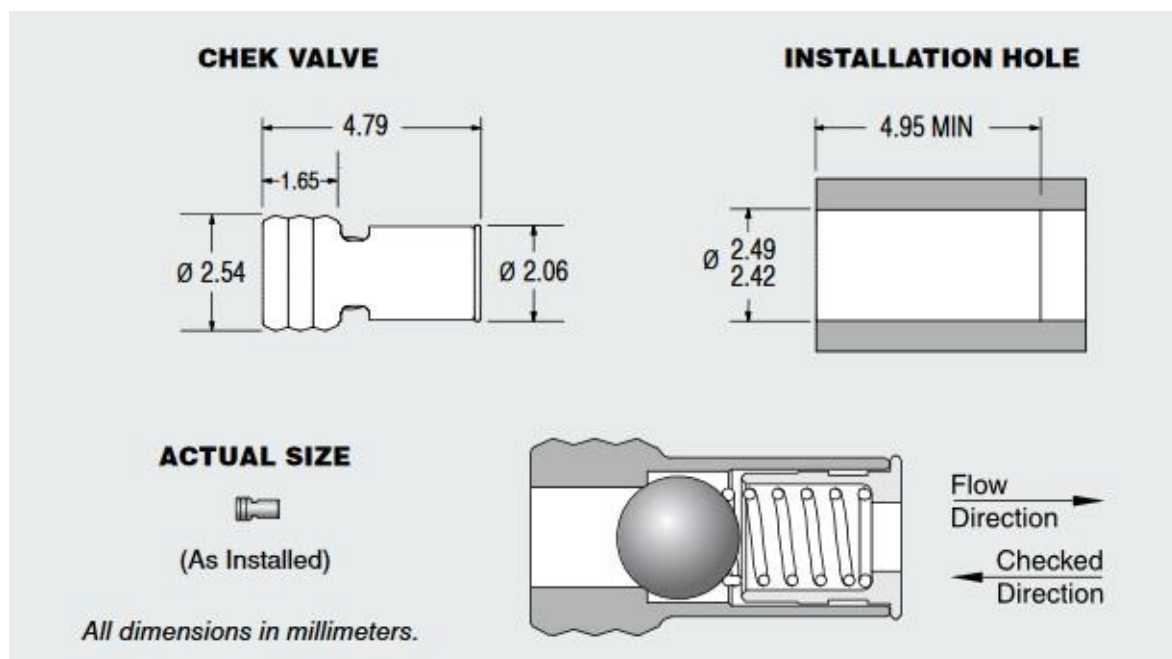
Schematic of the 2.5 mm check valve by The Lee Company [37]
